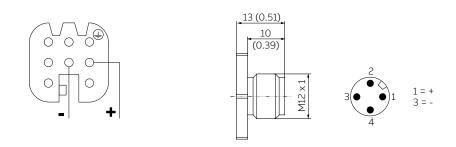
Pin layout of Harting HAN 8D (socket view) and M12 x 1 connector
